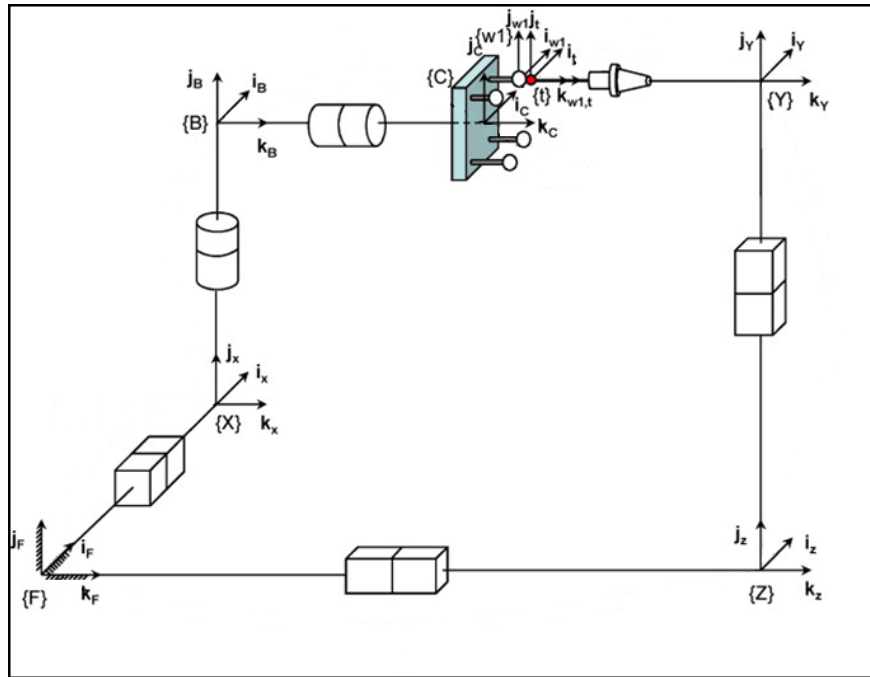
Nominal kinematic model of a five-axis machine tool with WCBXFZYST topology
